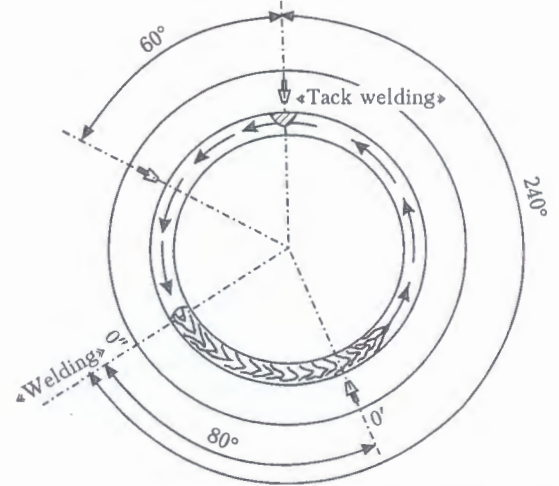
Scheme of welding of the cap with the cartridge
